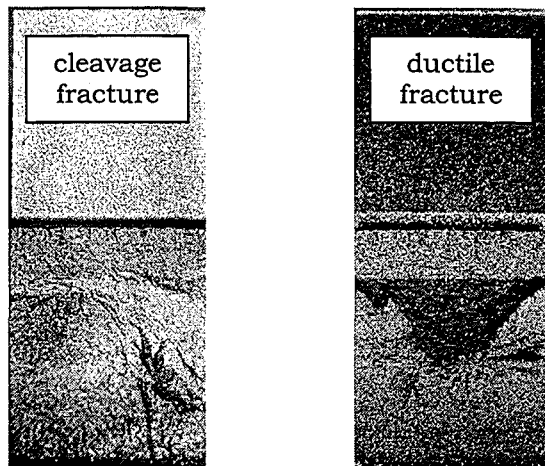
Fracture surface of broken compact tension specimen: cleavage versus ductile fracture.
